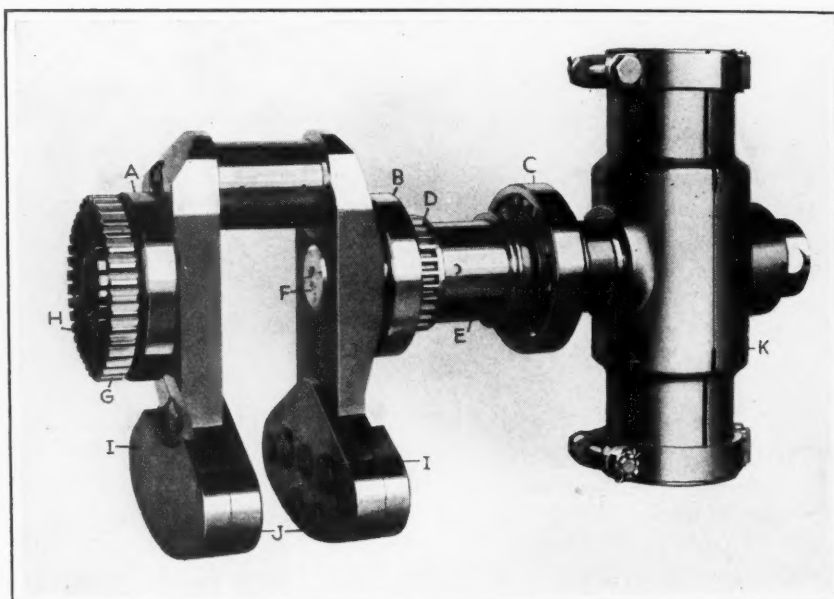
Two-piece Crankshaft Assembled without the Master Connecting-rod, but with the Propeller Hub, Driving Pinions, and Ball and Roller Bearings in Place
